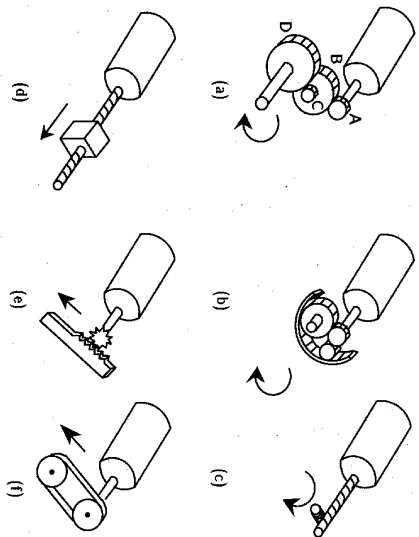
(a) Spur gears mesh pairs of gears with different numbers of teeth to achieve speed reduction. (b) Planetary gears have several gears meshed in an outer ring for large reduction. (c) Worm gears produce rotary motion at right angles to the shaft. (d) A lead screw and nut can create linear motion as can (e) rack-and-pinion systems and (f) belt-and-pulley drives.
